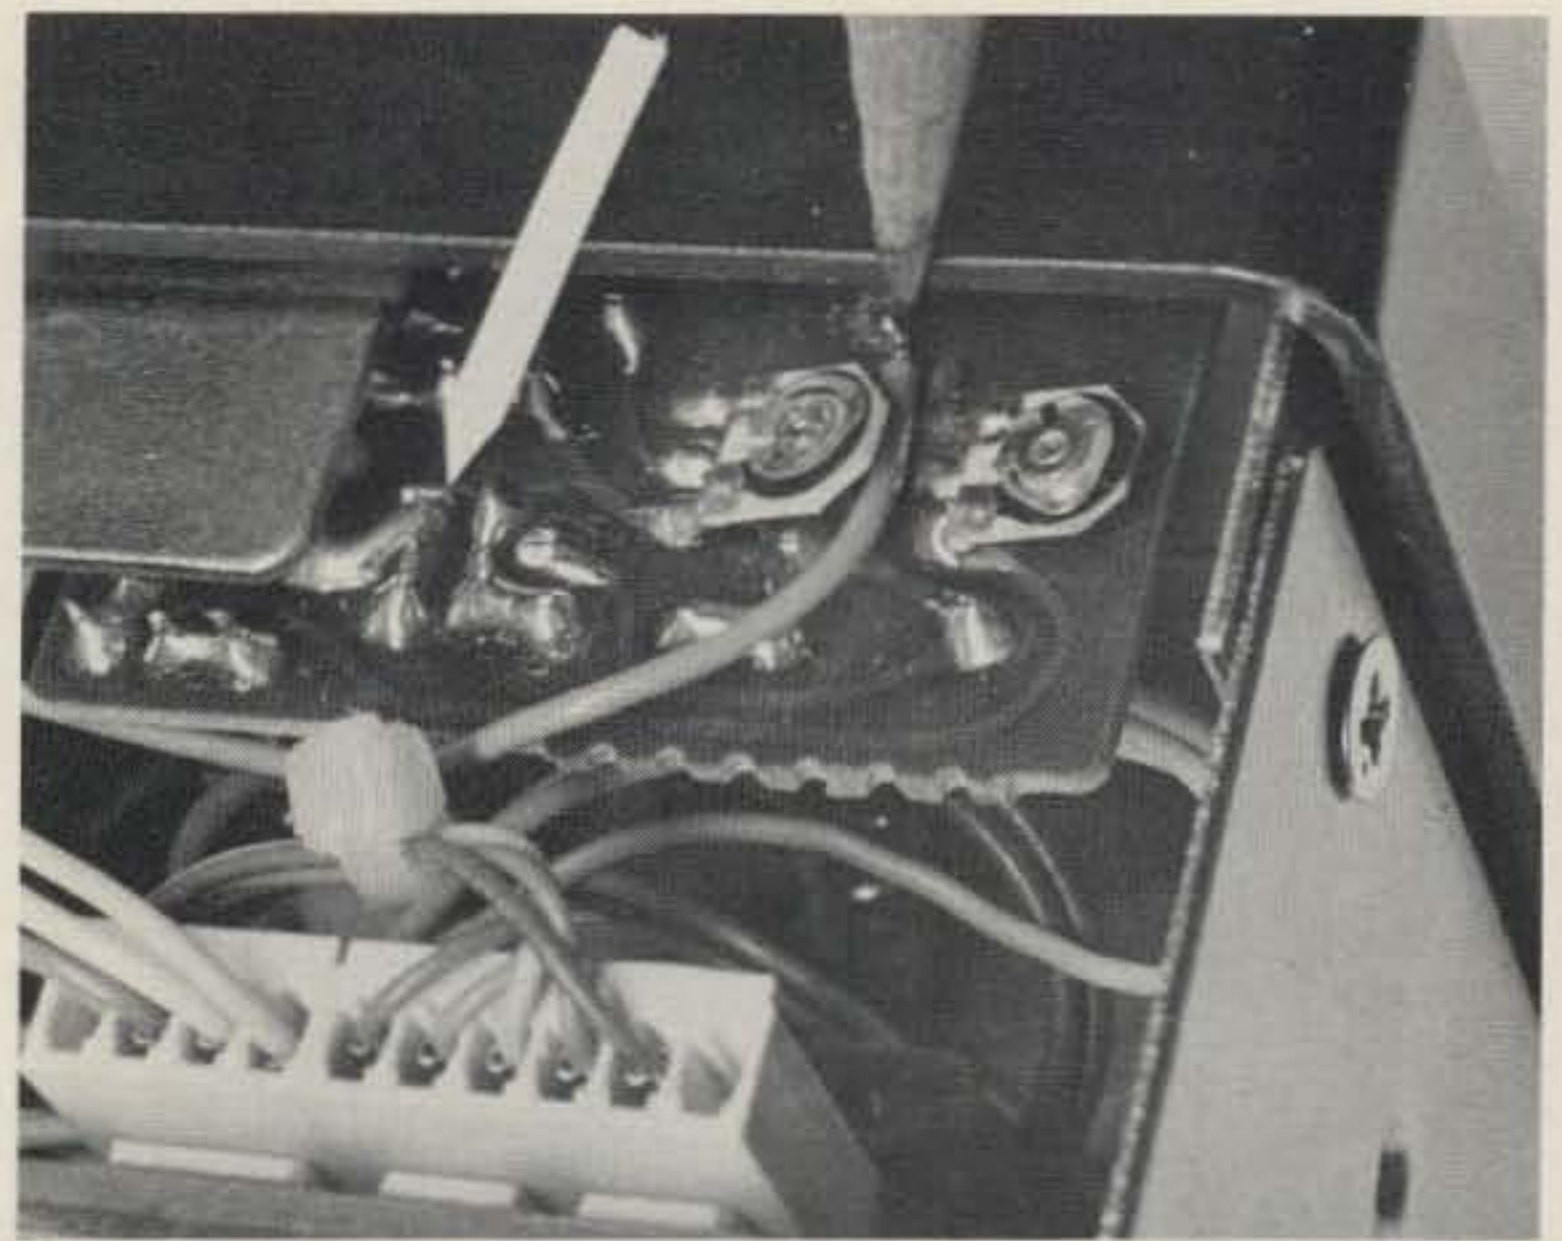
Photo C. RIT board. Arrow shows where REC 8-V wire should be connected. Between the two capacitors, green wire SQ is soldered to the board.
